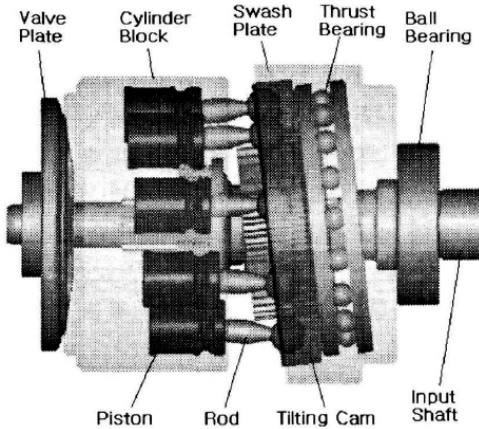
Construction of swash plate type axial piston water hydraulic pump
